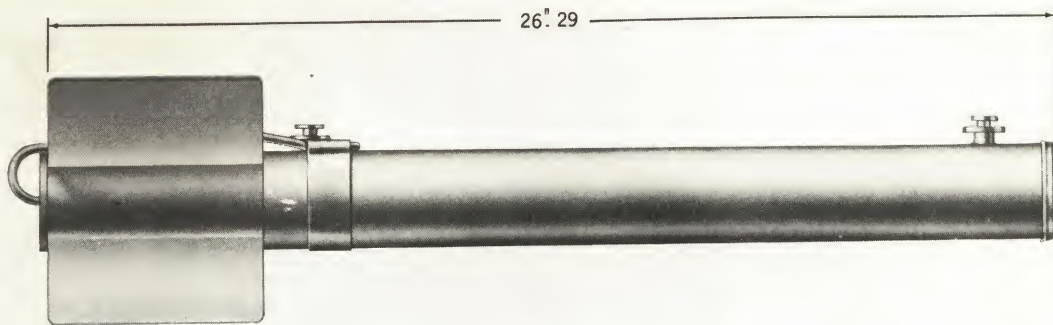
2.25-Inch Rocket Motor Mk 16 Mod 6, External View.
